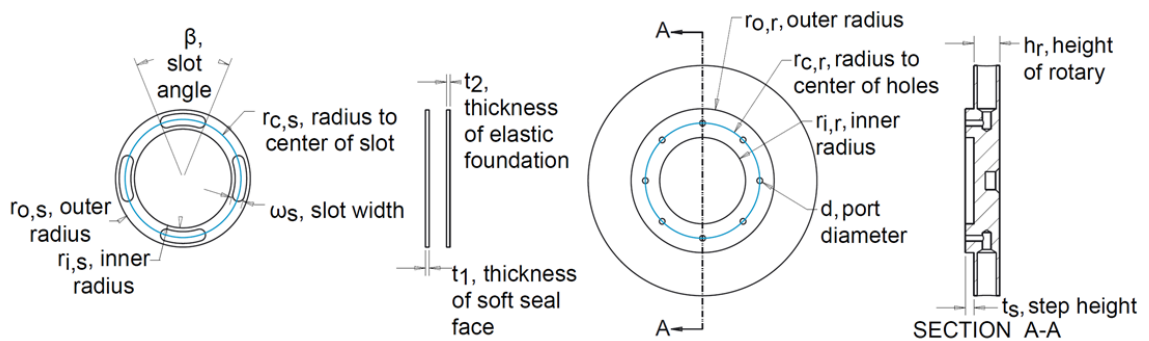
nomenclature for dimensions of the axial flow rotary valve seal
